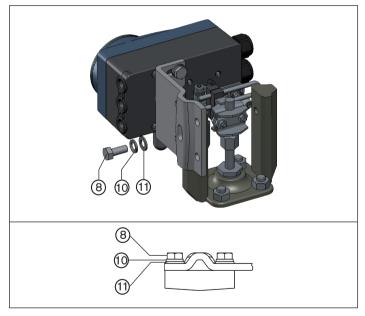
Attach positioner with mounting bracket; for actuators with cast frame
